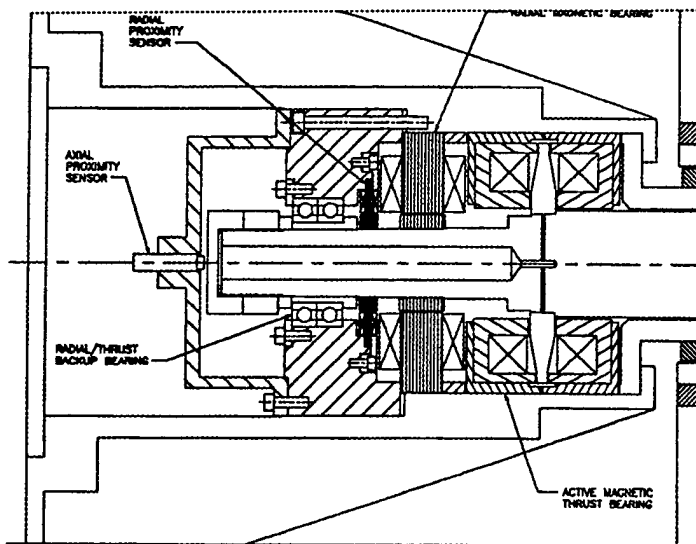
Cross-section of Lower Magnetic Bearing
